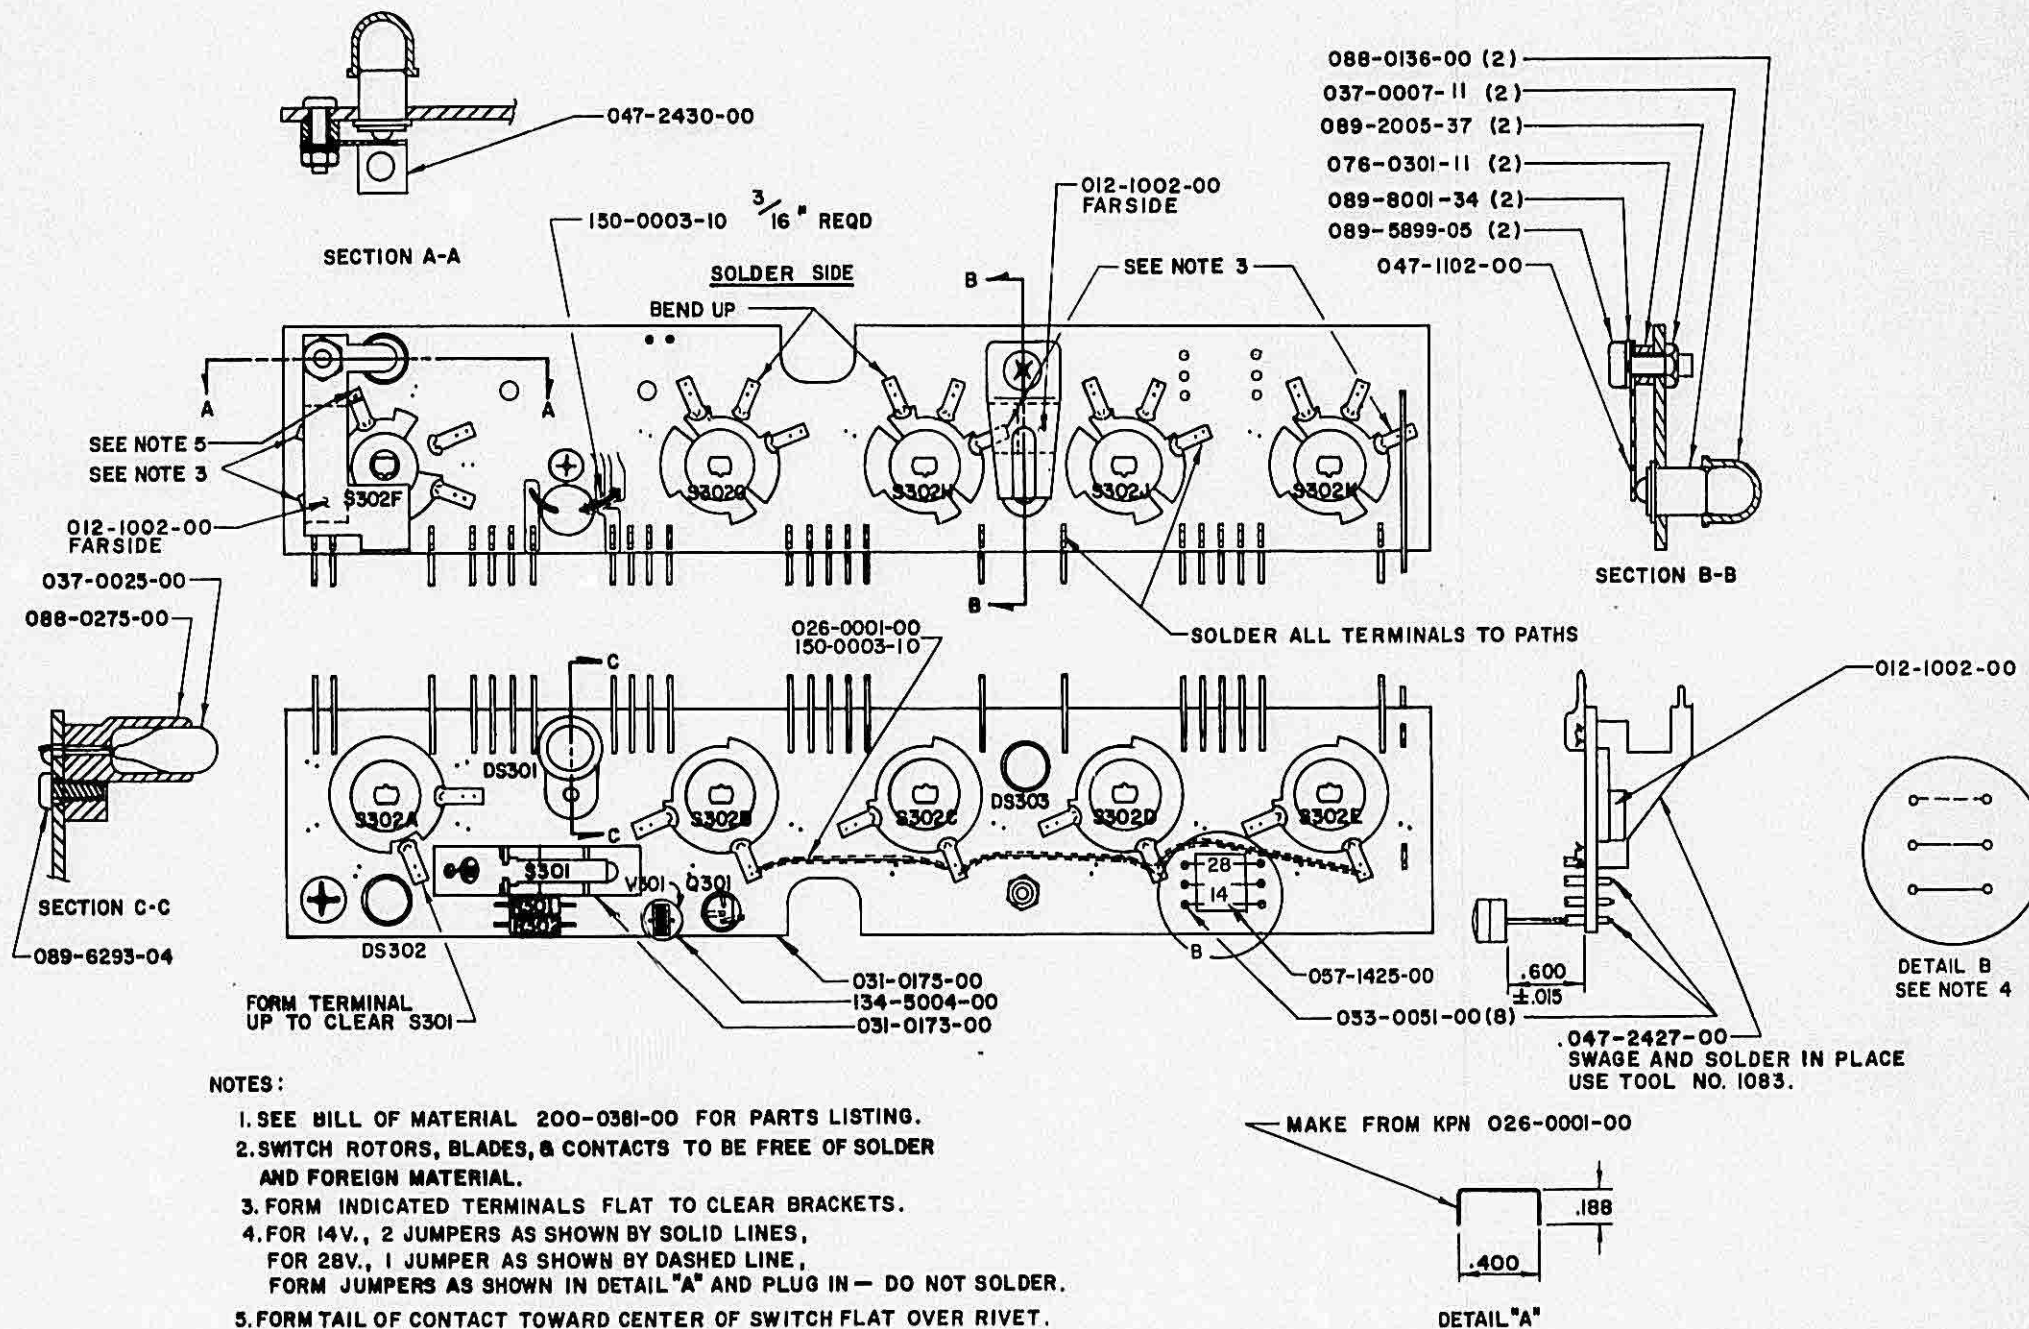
SWITCH BOARD ASSEMBLY
